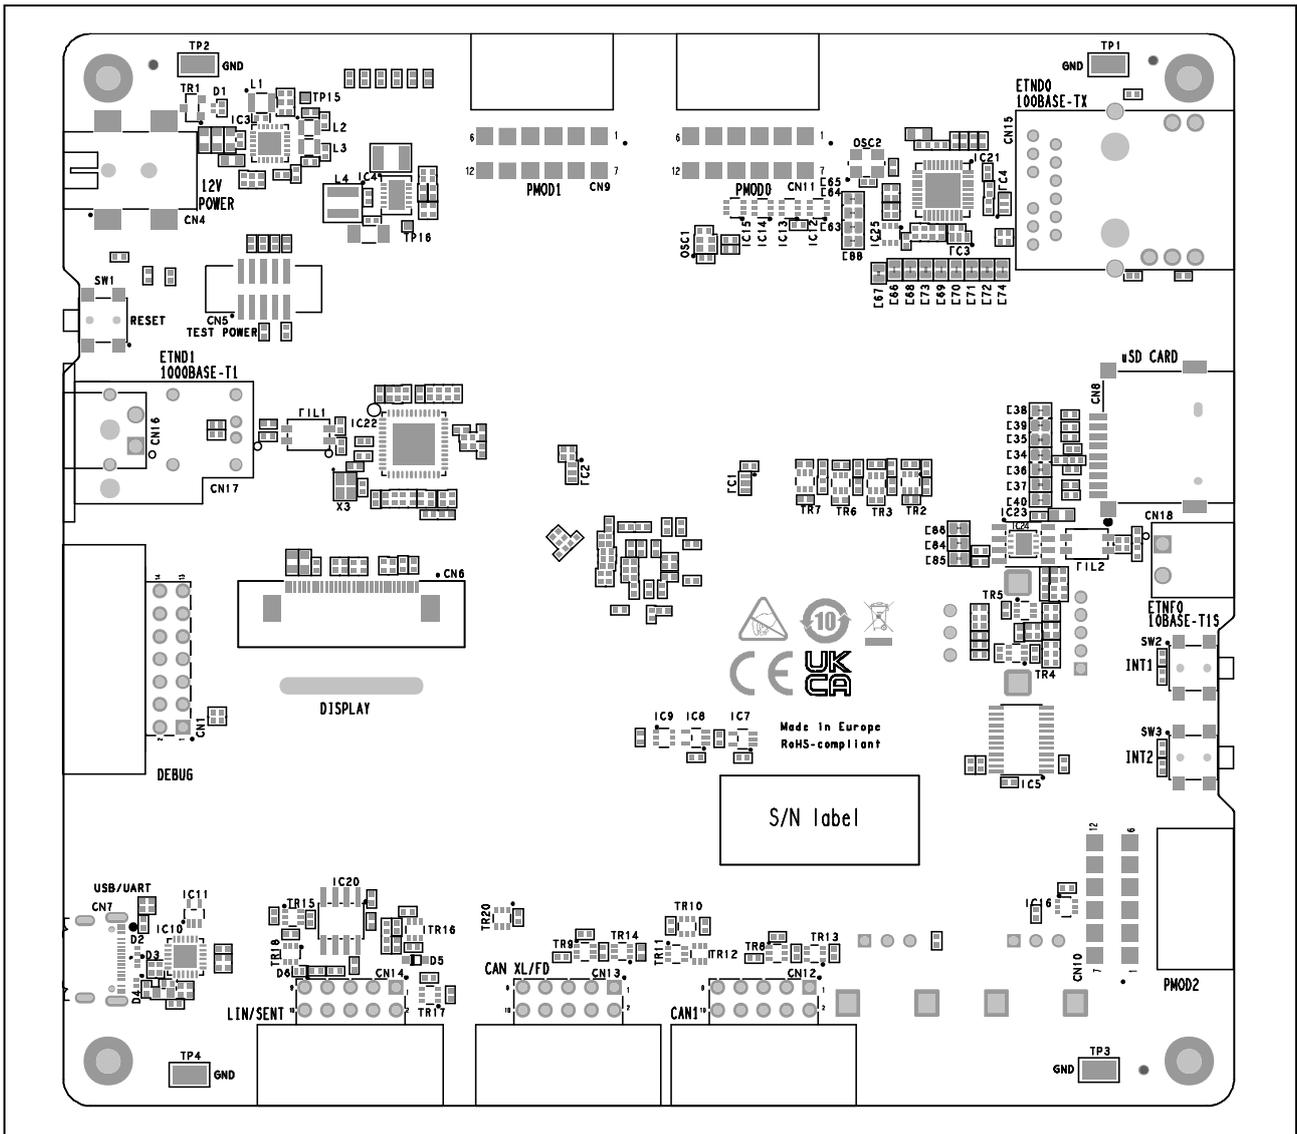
Starter kit board bottom view for board version D020925_06_V0100
